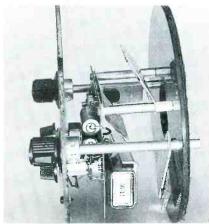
THE RECEIVER ASSEMBLY. It is mounted inside one end of a large tube which has a fresnel lens at the other end.
